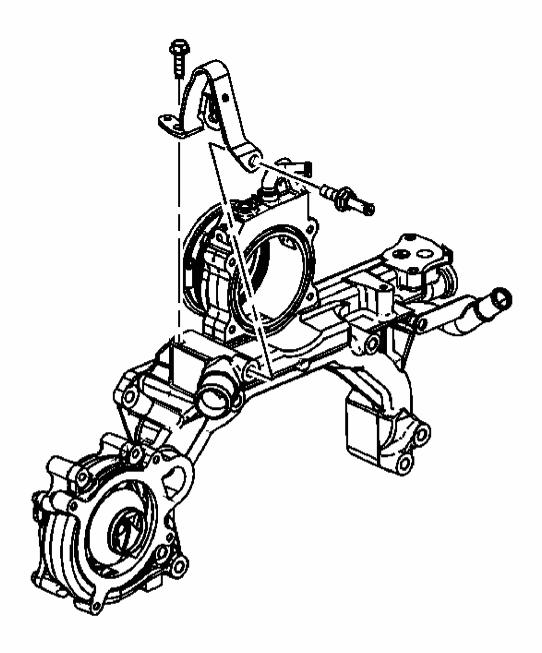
Identifying Engine Coolant Outlet Fitting Courtesy of GENERAL MOTORS CORP.
